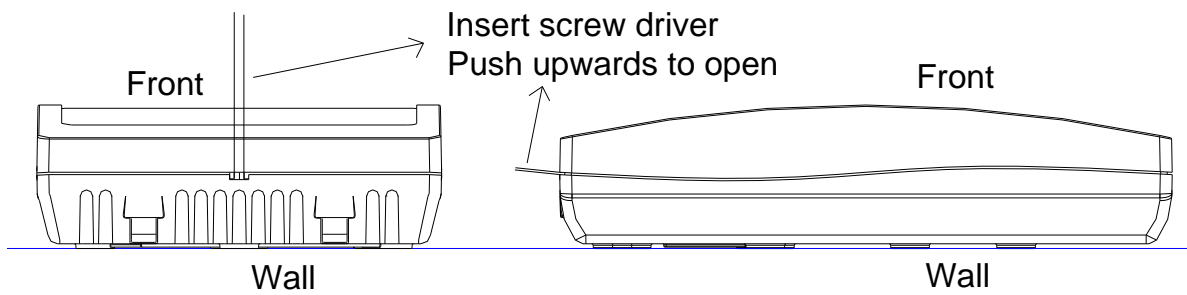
Closed housing seen from the top and the side. The housing is opened by inserting a screw driver and pushing to the front side of the housing. The locking hooks will then be released.
